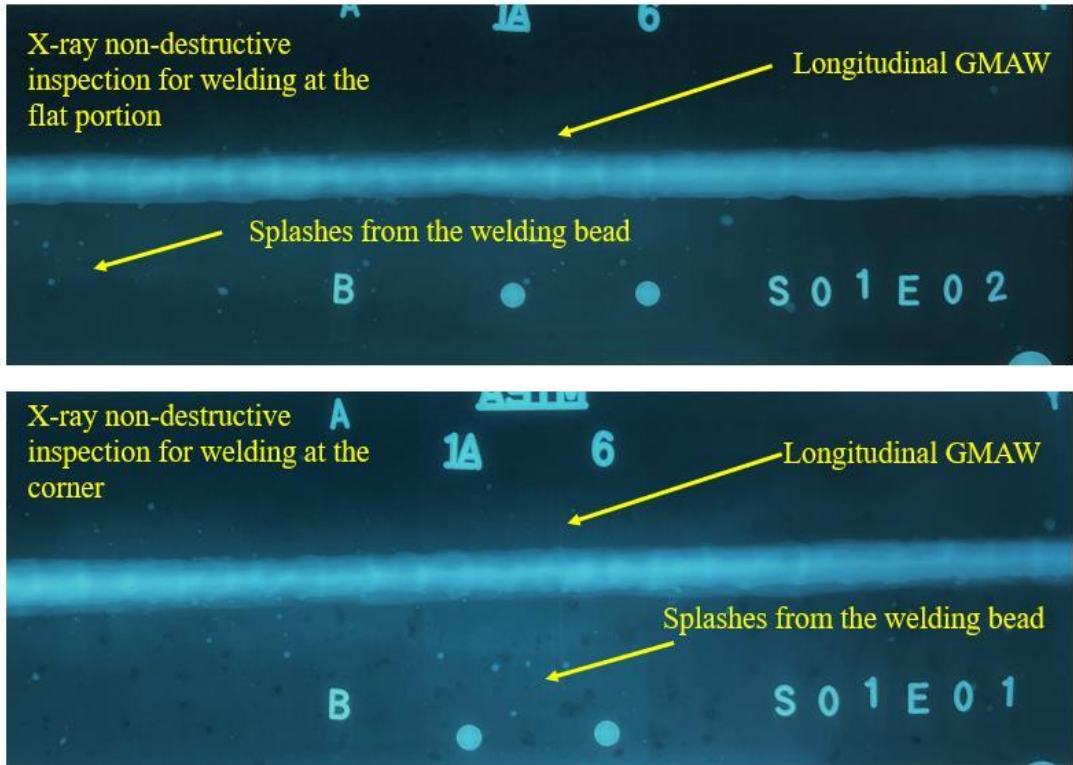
X-ray non-destructive inspection for the corner welding and butt welding at flat portion
